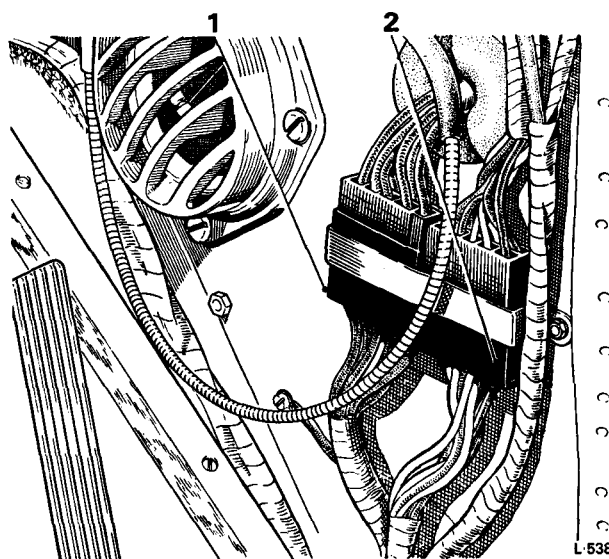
POSITION OF WIRING PLUG LOOM AND SOCKET FOR R.H. FRONT DOOR
